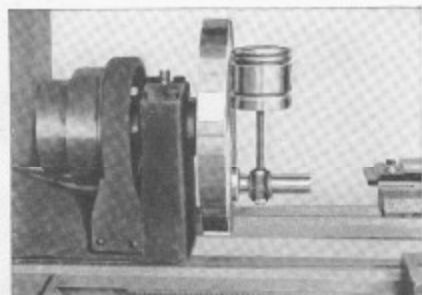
Aligning Piston and Connecting Rod on Face Plate of Lathe.
